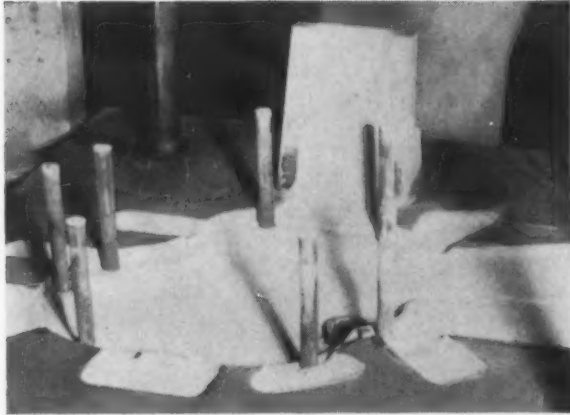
Application of coating to aluminum permanent molds eases casting release and extends tool life.
